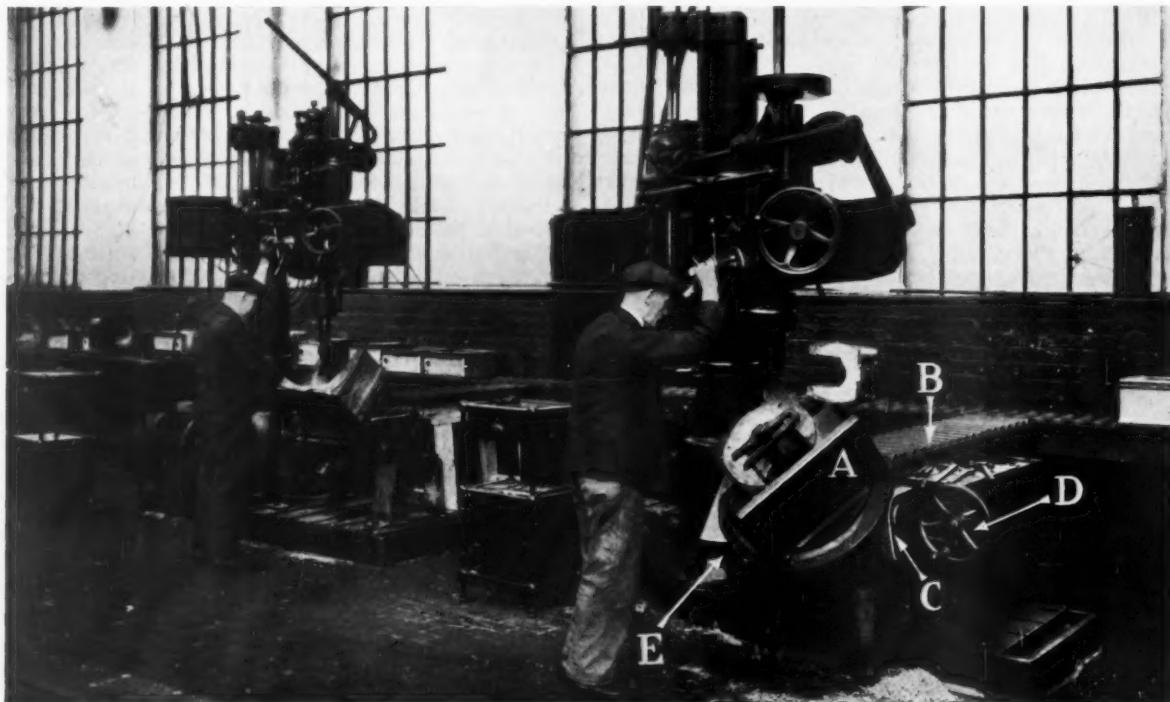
Drilling oil holes in axleboxes on Asquith radial arm machines
